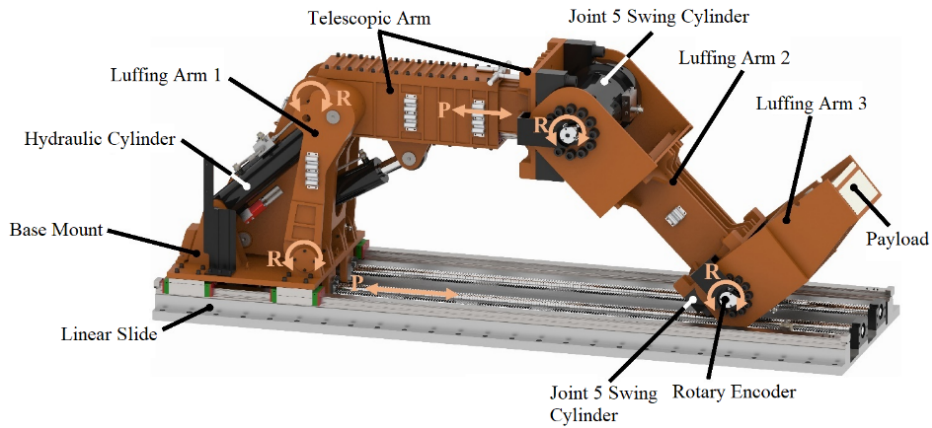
Mechanical configuration of the replacement robot (joint layout)
